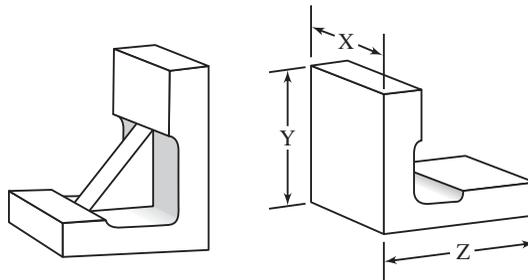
Type VI, Toolmaker's Non-adjustable Knee
